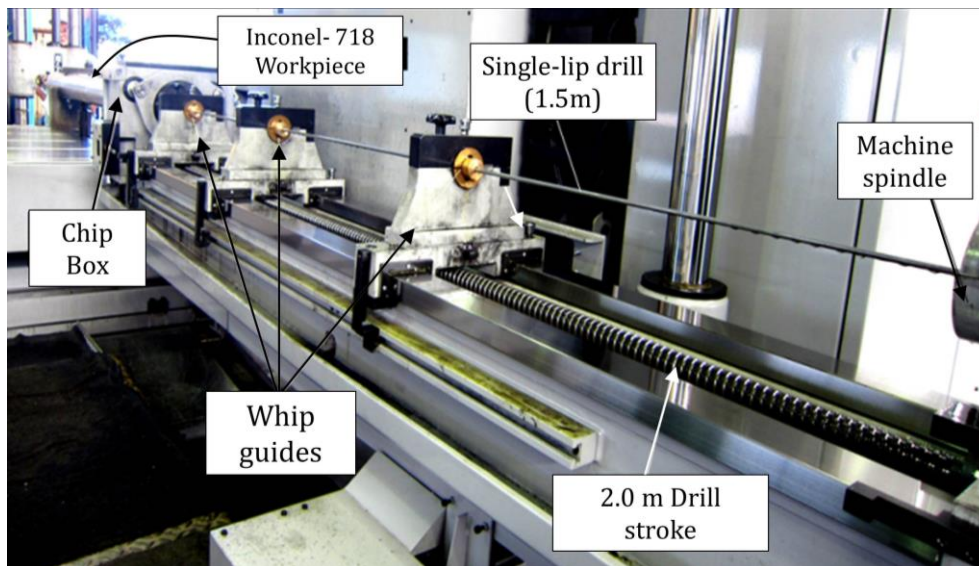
Machine set-up for the first set of deep hole drilling experiments
